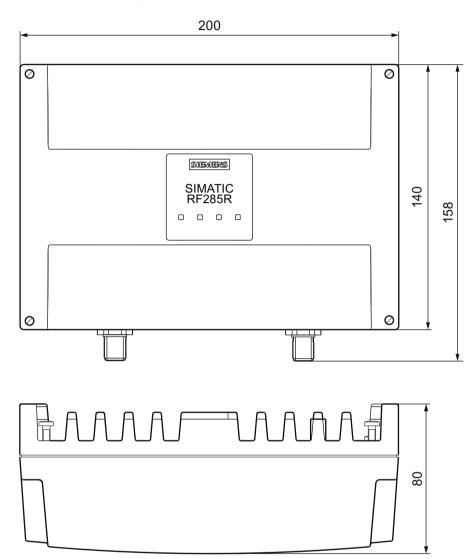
Dimension drawing RF285R (dimensions in mm)
